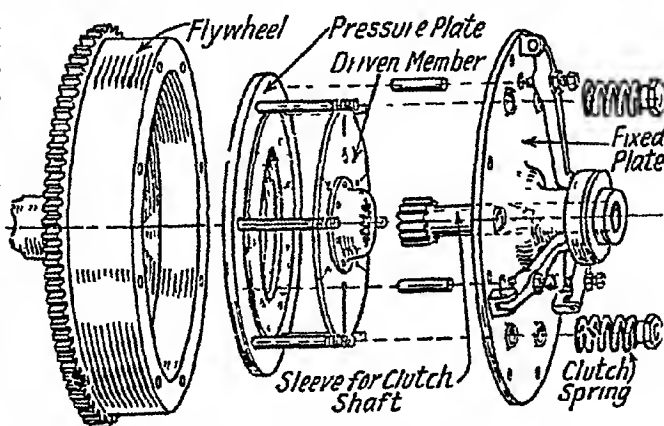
A single-plate clutch in extended order. The clutch forms the coupling between engine and gear-box.
